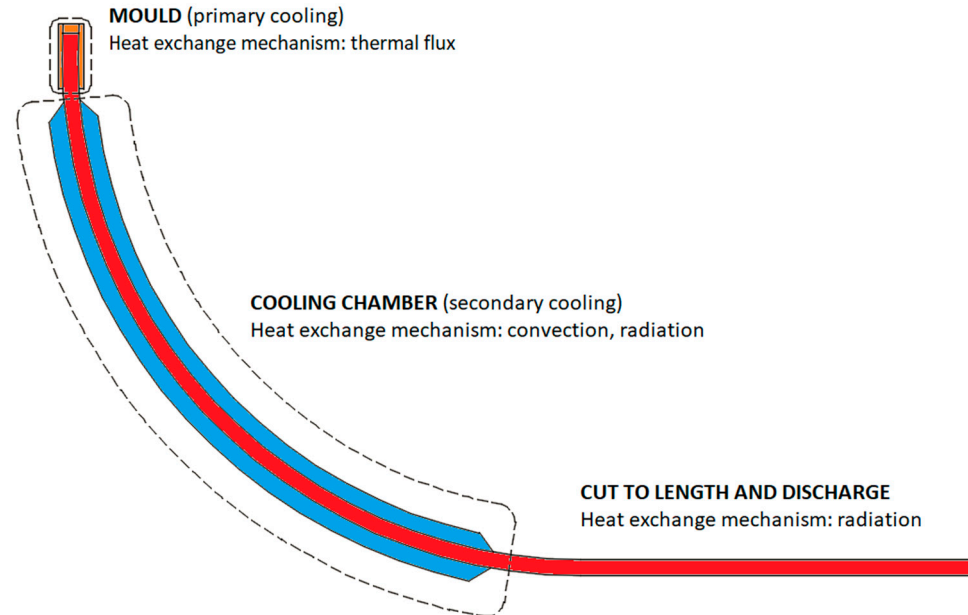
Prevailing heat exchange mechanisms in a continuous casting machine.
